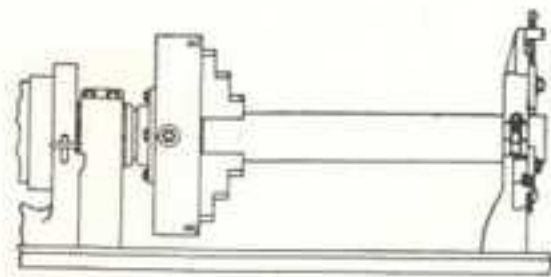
Work Mounted in Chuck and Supported by Steady Rest
